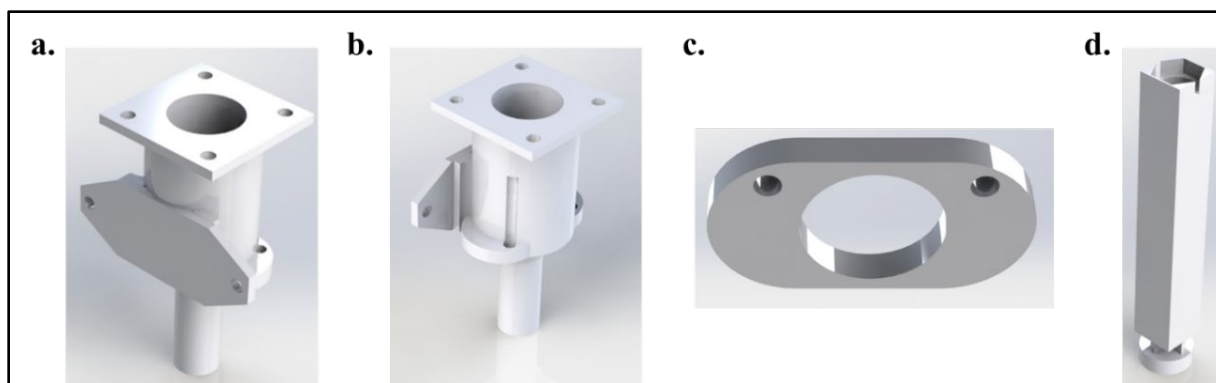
Syringe pump schematics. a. and b. Final syringe pump body design. Designed to fit directly onto the extruder plate of the Tronxy X1. c. Syringe holder designed to keep the syringe fixed to the syringe pump during printing. d. Syringe insert. Designed to fit rubber syringe gasket for improved performance. The M5 hex nut is glued to the insert to ensure perfectly coupled movement.
